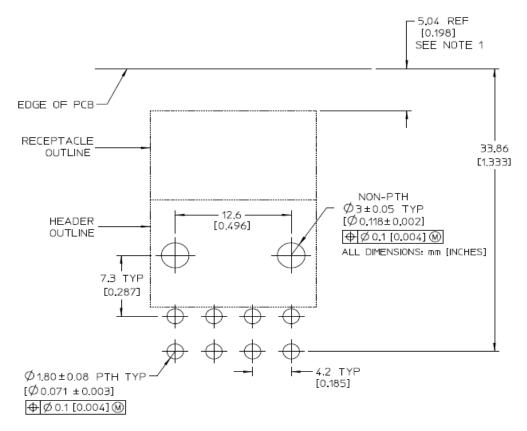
2 x 4 R/A Thru-Hole Recptacle Recommended PCB Footprint
